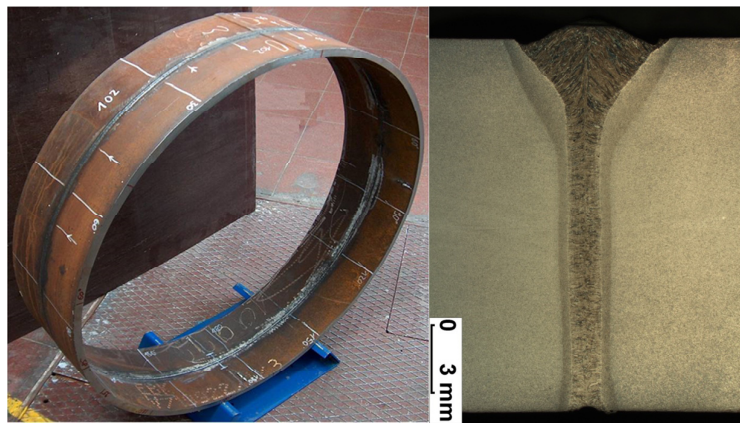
(a) Laserhybrid welded pipe 36", X65, thickness 16 mm; (b) Macrosection welded in PA position @ 17 kW laserpower and 2.2 m/min.
